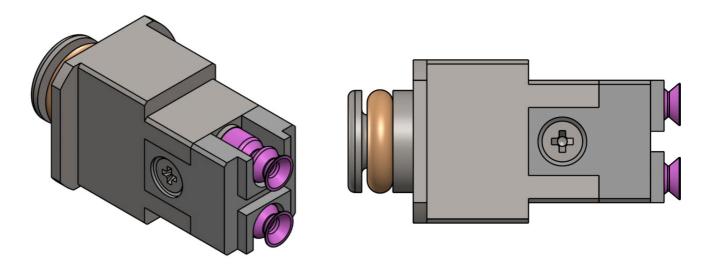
Suggested Power Tower Pickup Tool – 3D and Side View
